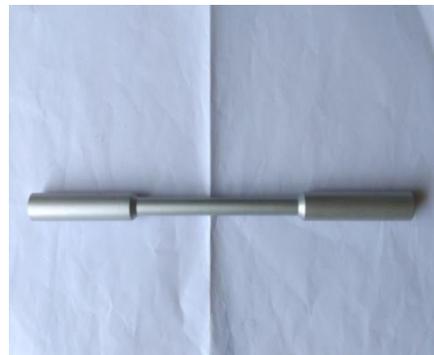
Specimen of Coated (Anodizing With Sand Blasting)
